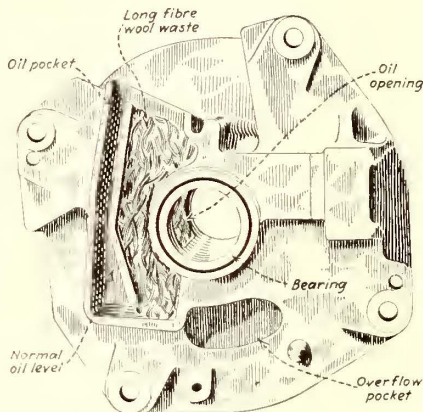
MODERN SOLID FRAME ARMATURE BEARING
